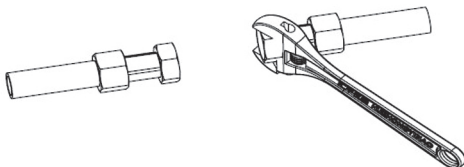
Meter Mounting Diagrammatic Sketch 4
